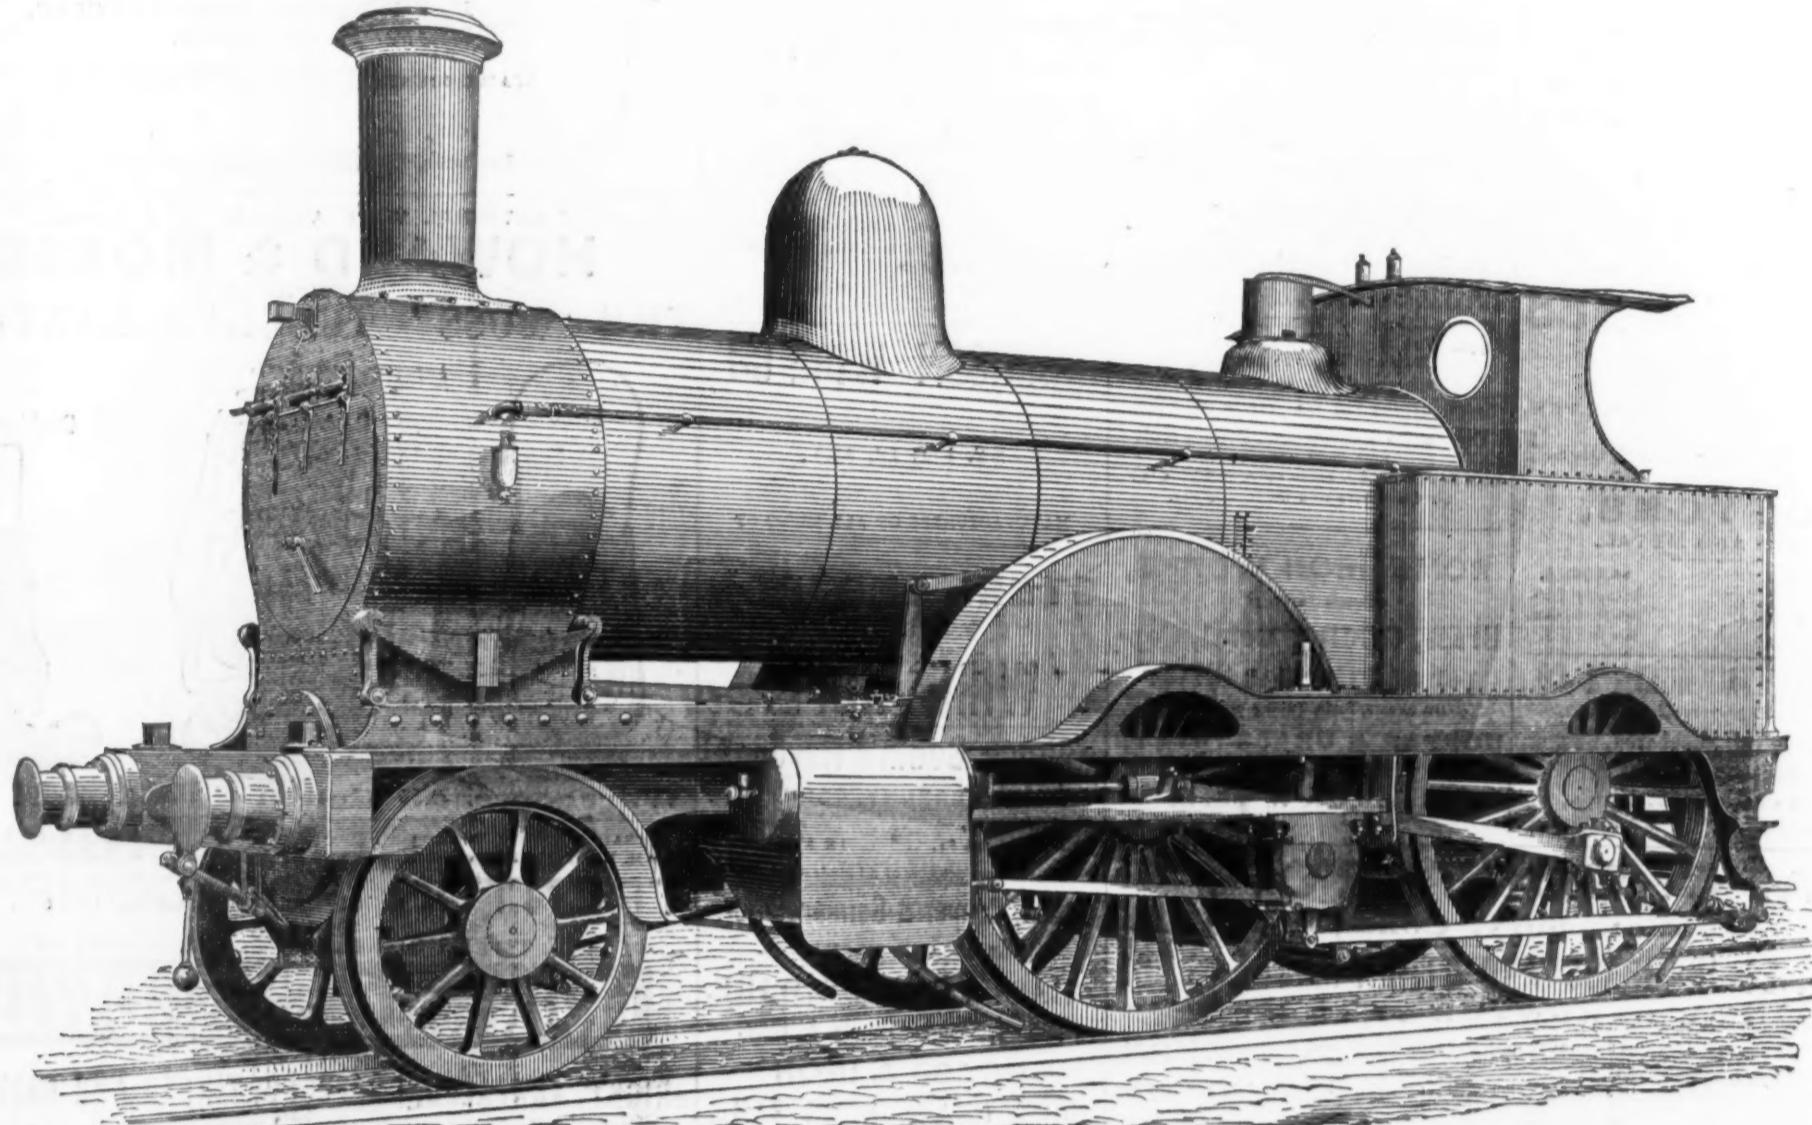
Perspective View—An Example Embodying Application of the Joy Valve Gear.
